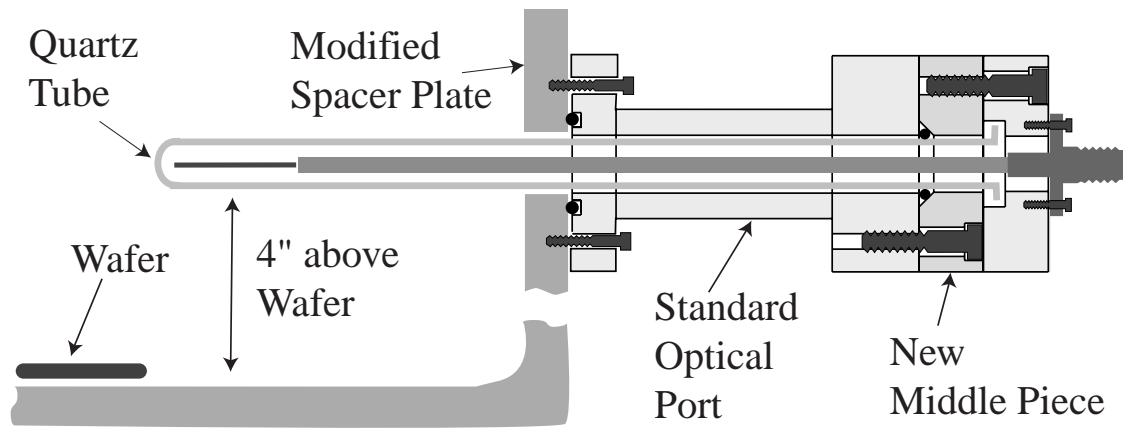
Schematic of probe design for Lam 9400, exploiting existing modifications to spacer plate
